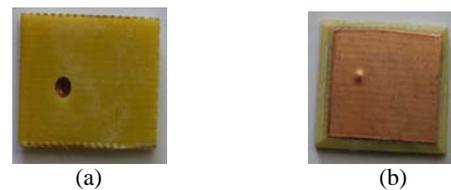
Drilling of hole in the PCB nozzle (a) showing the top view through insulator (b) showing image through metallic layer (bottom side of PCB nozzle for the orifice design)
